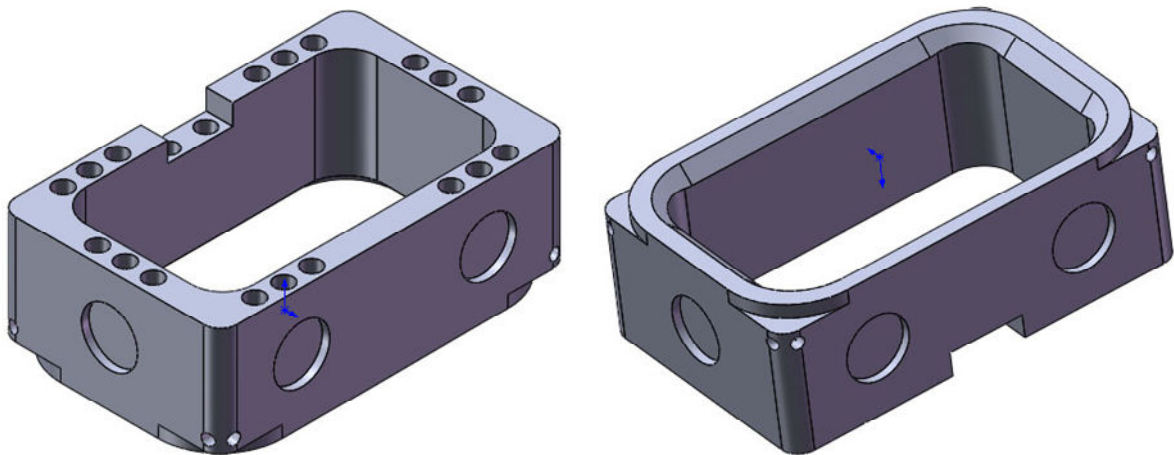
Prototype flange clamp top (holes for springs visible) and base (contact with tray flange). Individual flange clamping produces a flat top rim to improve heat sealing of product.
